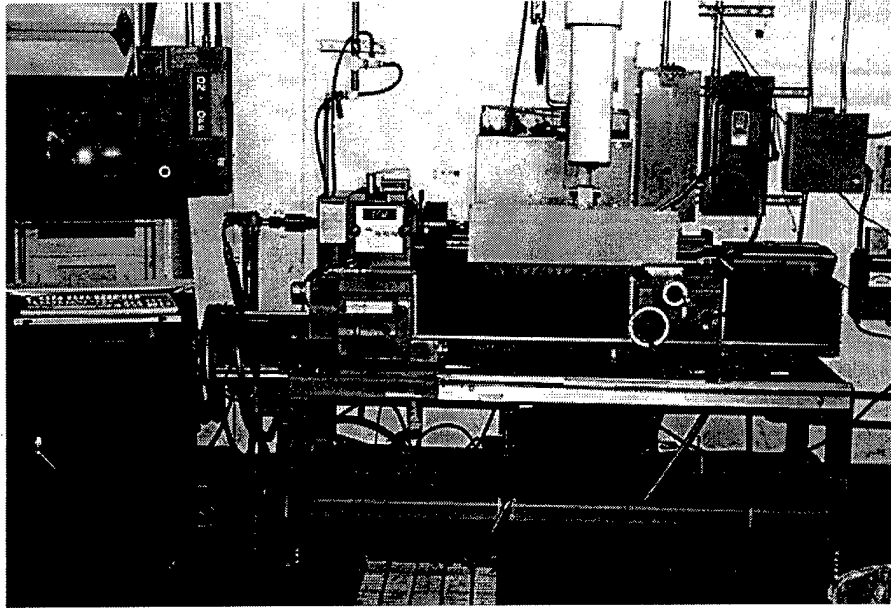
Test Setup for Rotating Waterjet Nozzle and Traversing Tube Sections
